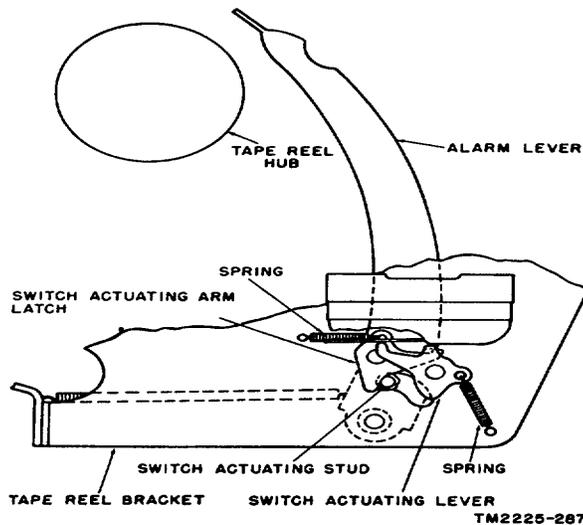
Tape-out alarm mechanism (TT-76/CGGC).
